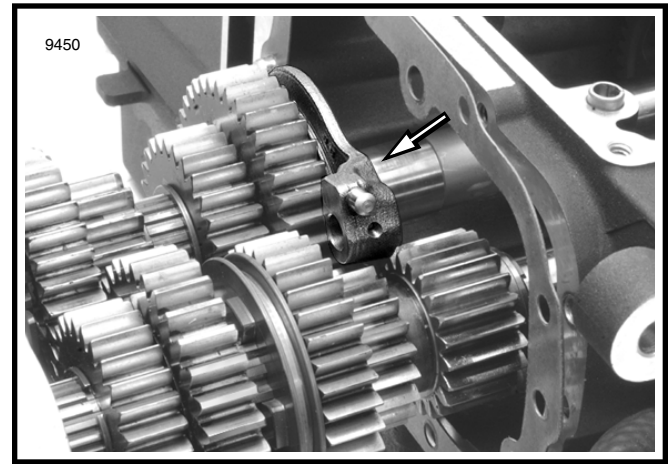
Install 5-6 Shifter Fork Onto Shift Ring
